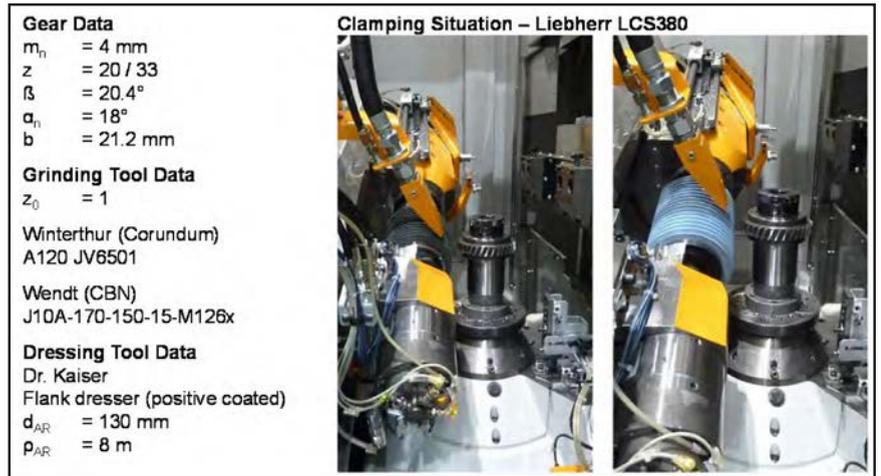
Gear geometry, machine tool and tool data — pitting tests.
